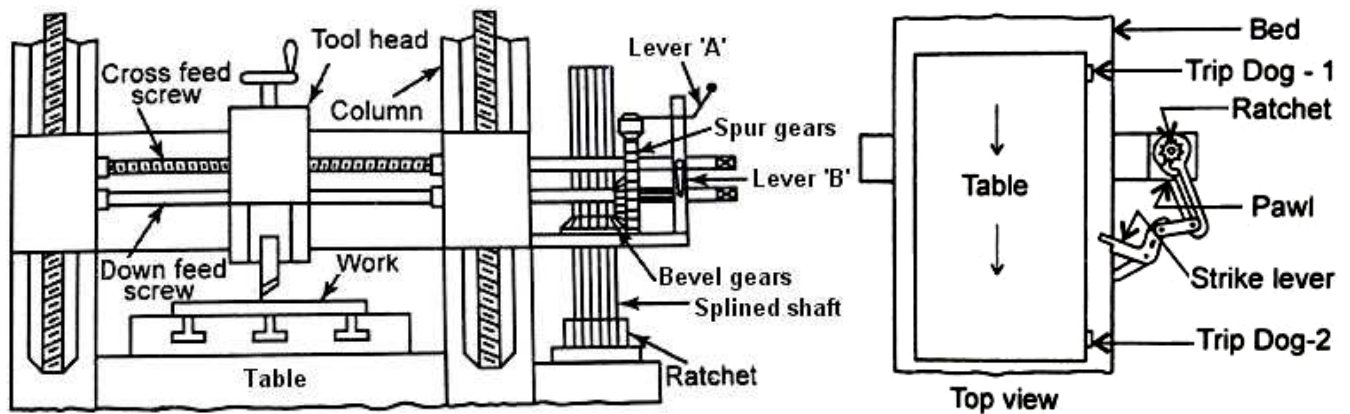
Front and top view of the automatic feed mechanism of a planer
